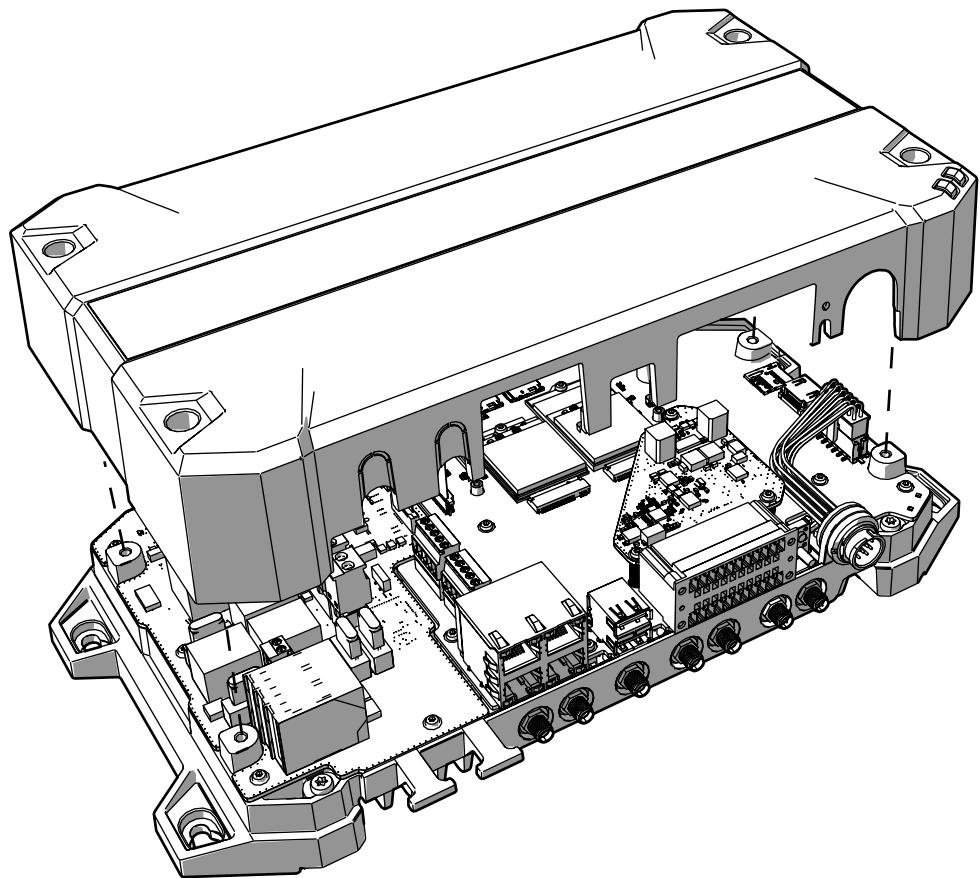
Remove the cover of the EXPLORER Mobile Gateway
